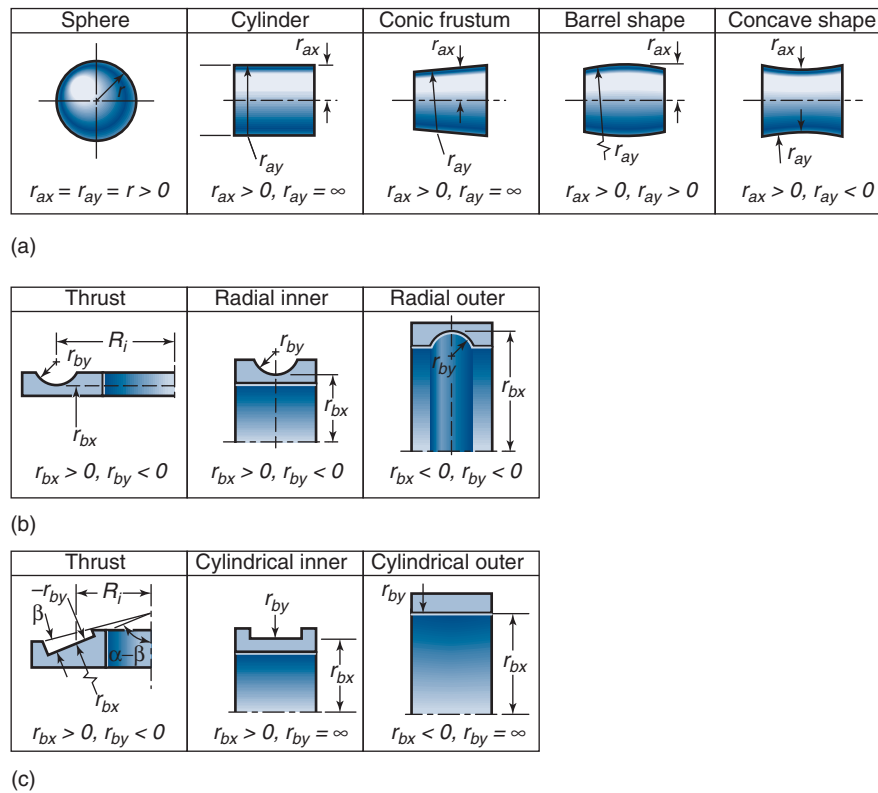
Sign designations for radii of curvature. (a) Rolling elements; (b) ball bearing races; (c) rolling bearing races.
